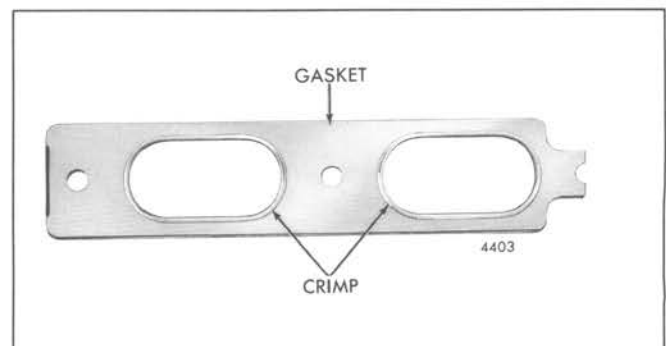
Metal Clad Exhaust Manifold Gasket
